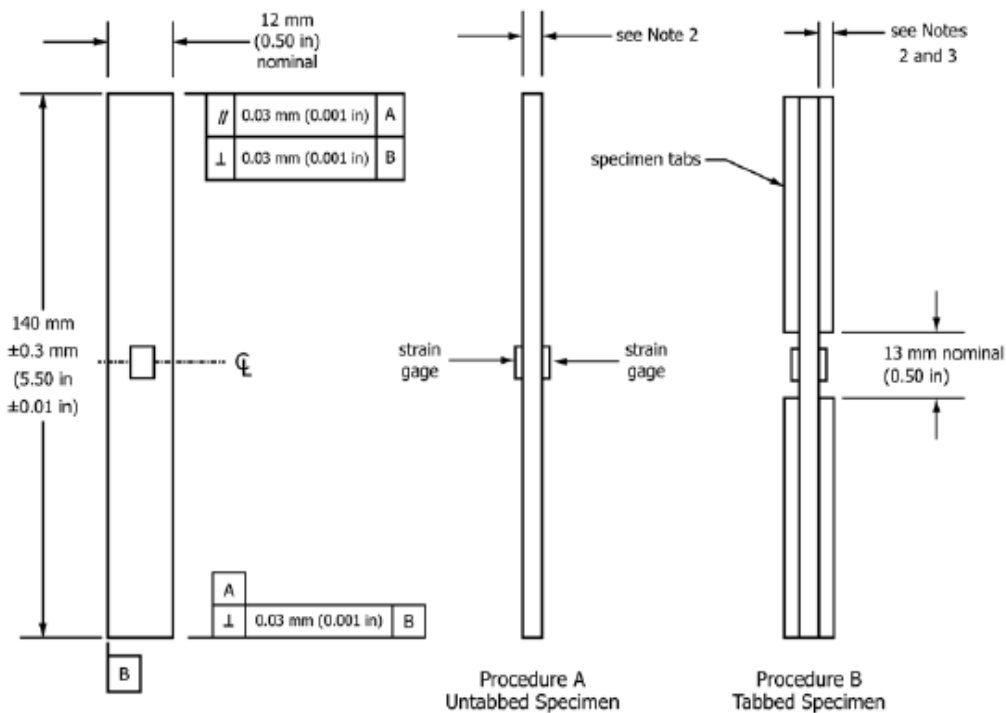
Typical ASTM D 6641 Test specimen configuration [50]
